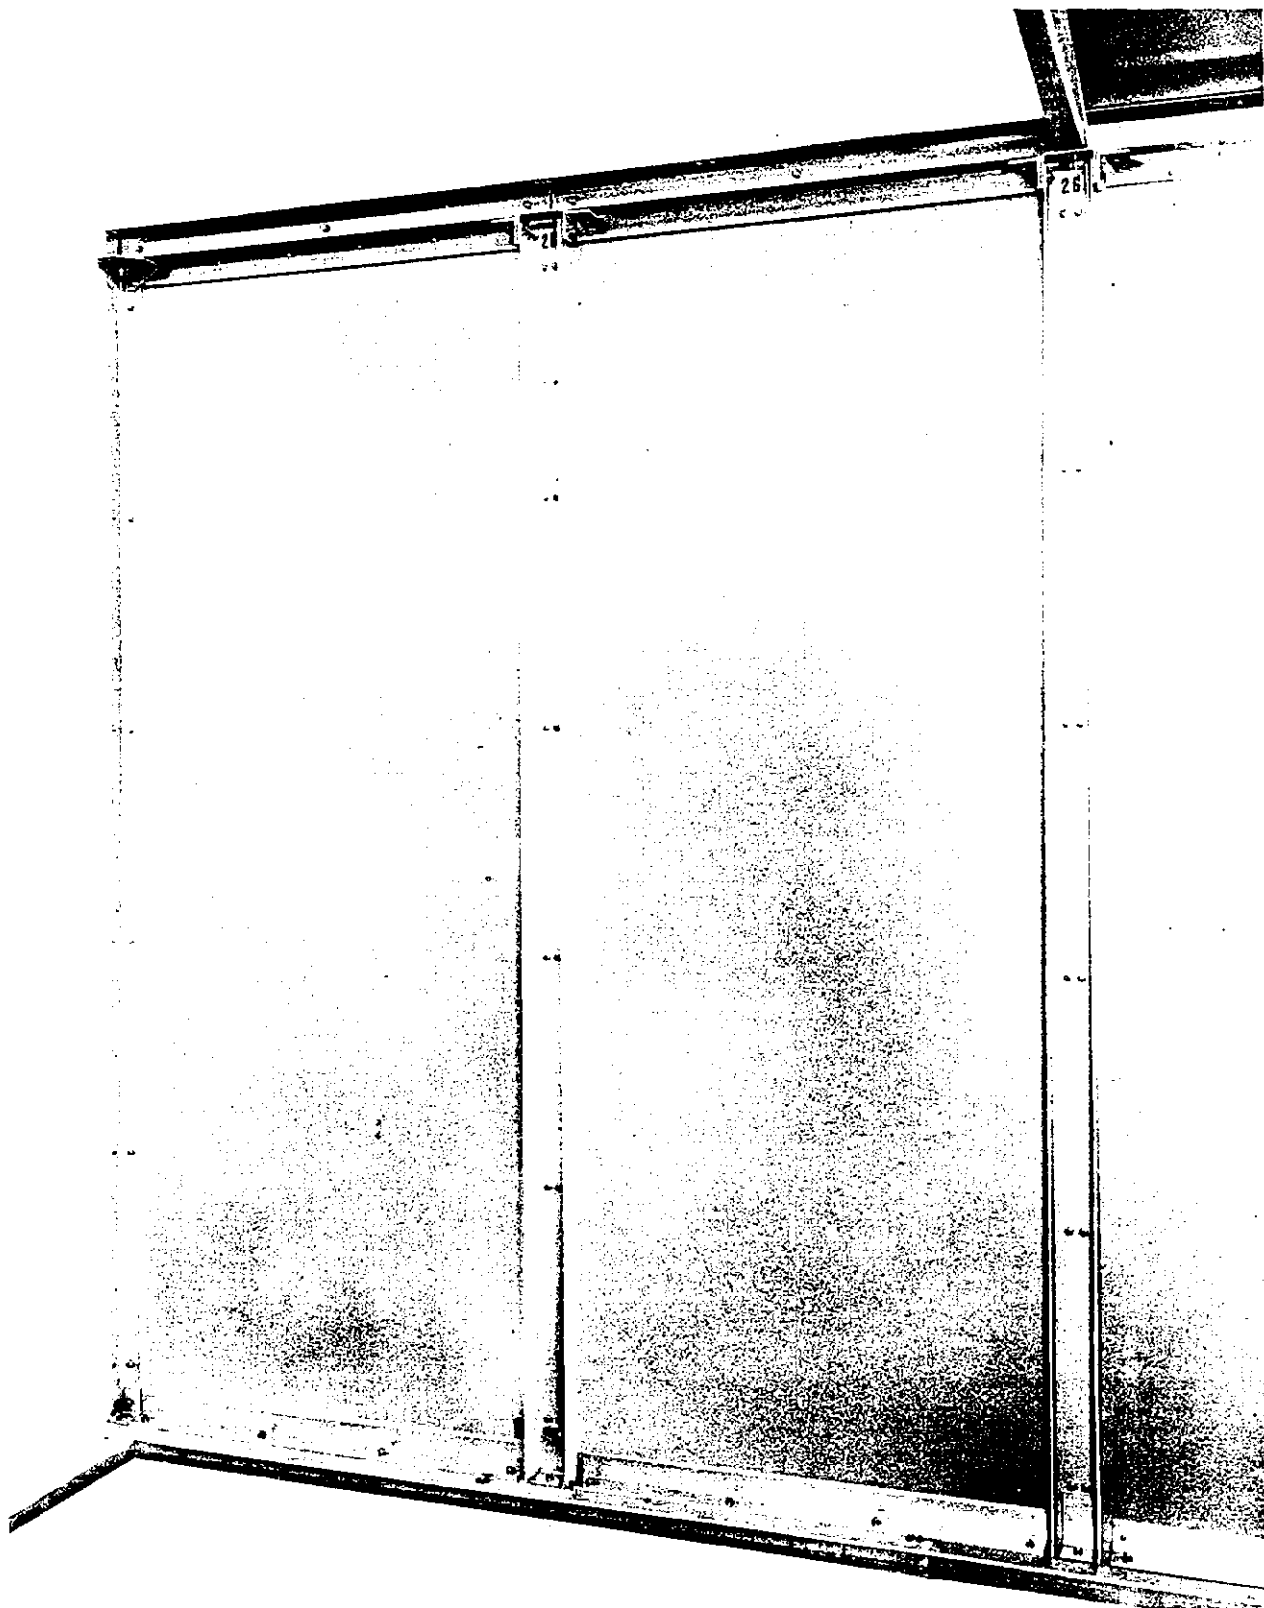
Enclosure, Partial Assembly, Finishing End, Rear Corner Detail
